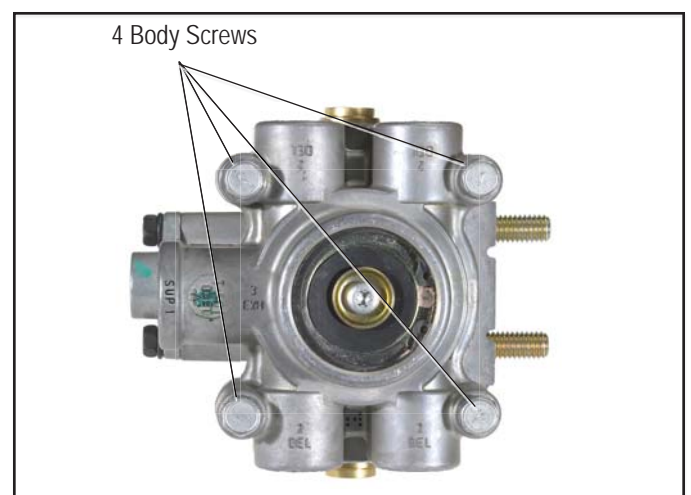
BOTTOM VIEW OF SR-7™ VALVE
